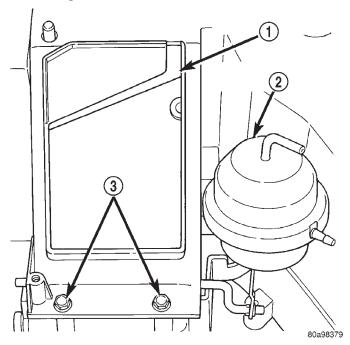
Heater-A/C Housing Floor Outlet Screws
